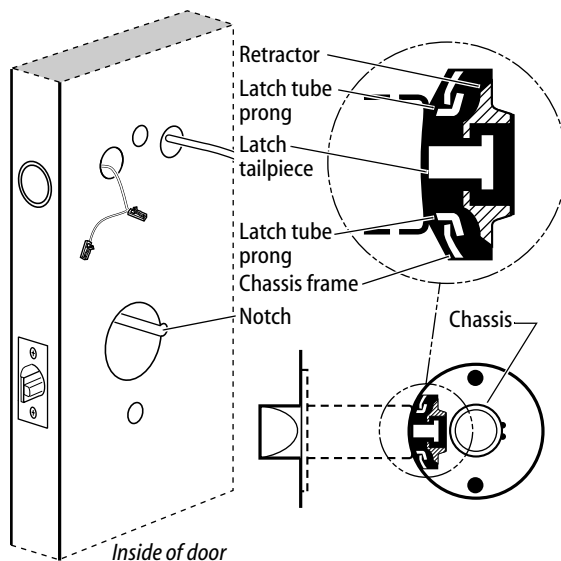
Installing the lock chassis and engaging the retractor in the latch
